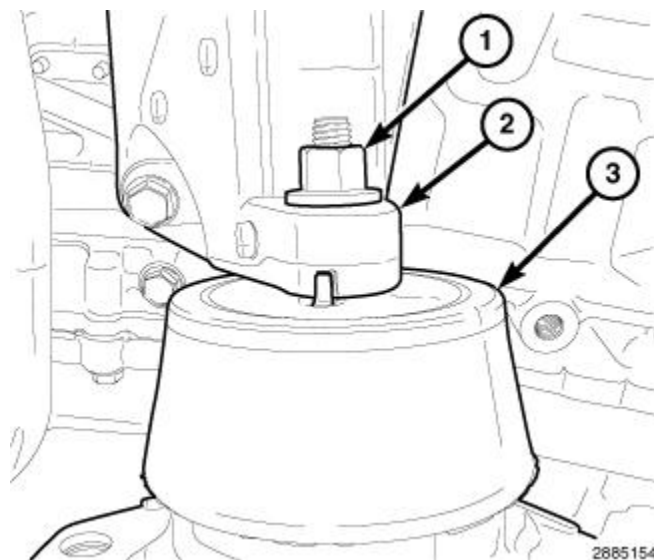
Left Engine Mount Isolator & Upper Retaining Nut
